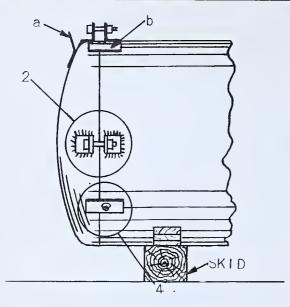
Fitting the Dished Head with the Shell in a Horizontal Position
